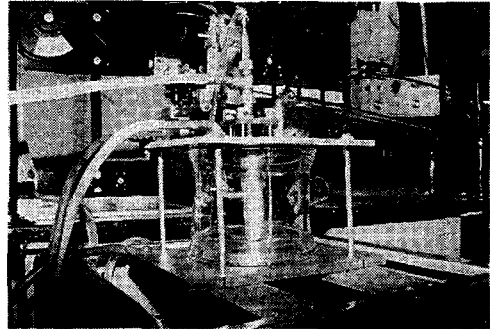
Photograph of the Apparatus Constructed to Make the Stationary Gas Tungsten Arc Welds; It has the water cooling system at tungsten electrode and copper plate
